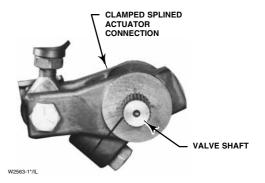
Clamped Splined Actuator Connection on Type 1061 Actuator
